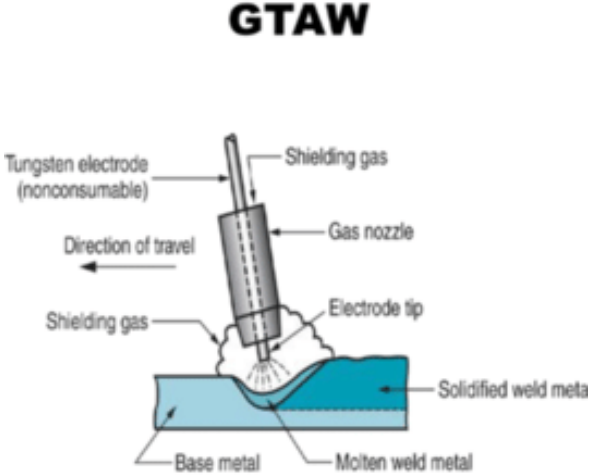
Gas Tungsten Arc Welding (GTAW) method.[22]
